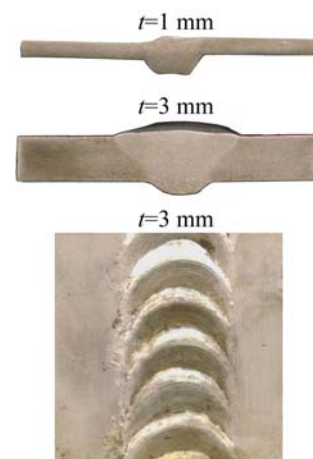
Macro-morphology of vibratory welded seam
